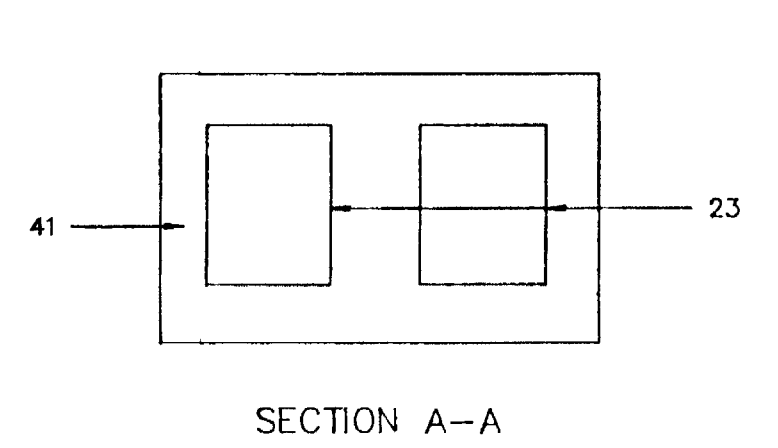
3SA Switchboard Assembly (Sheet 2 of 3)
